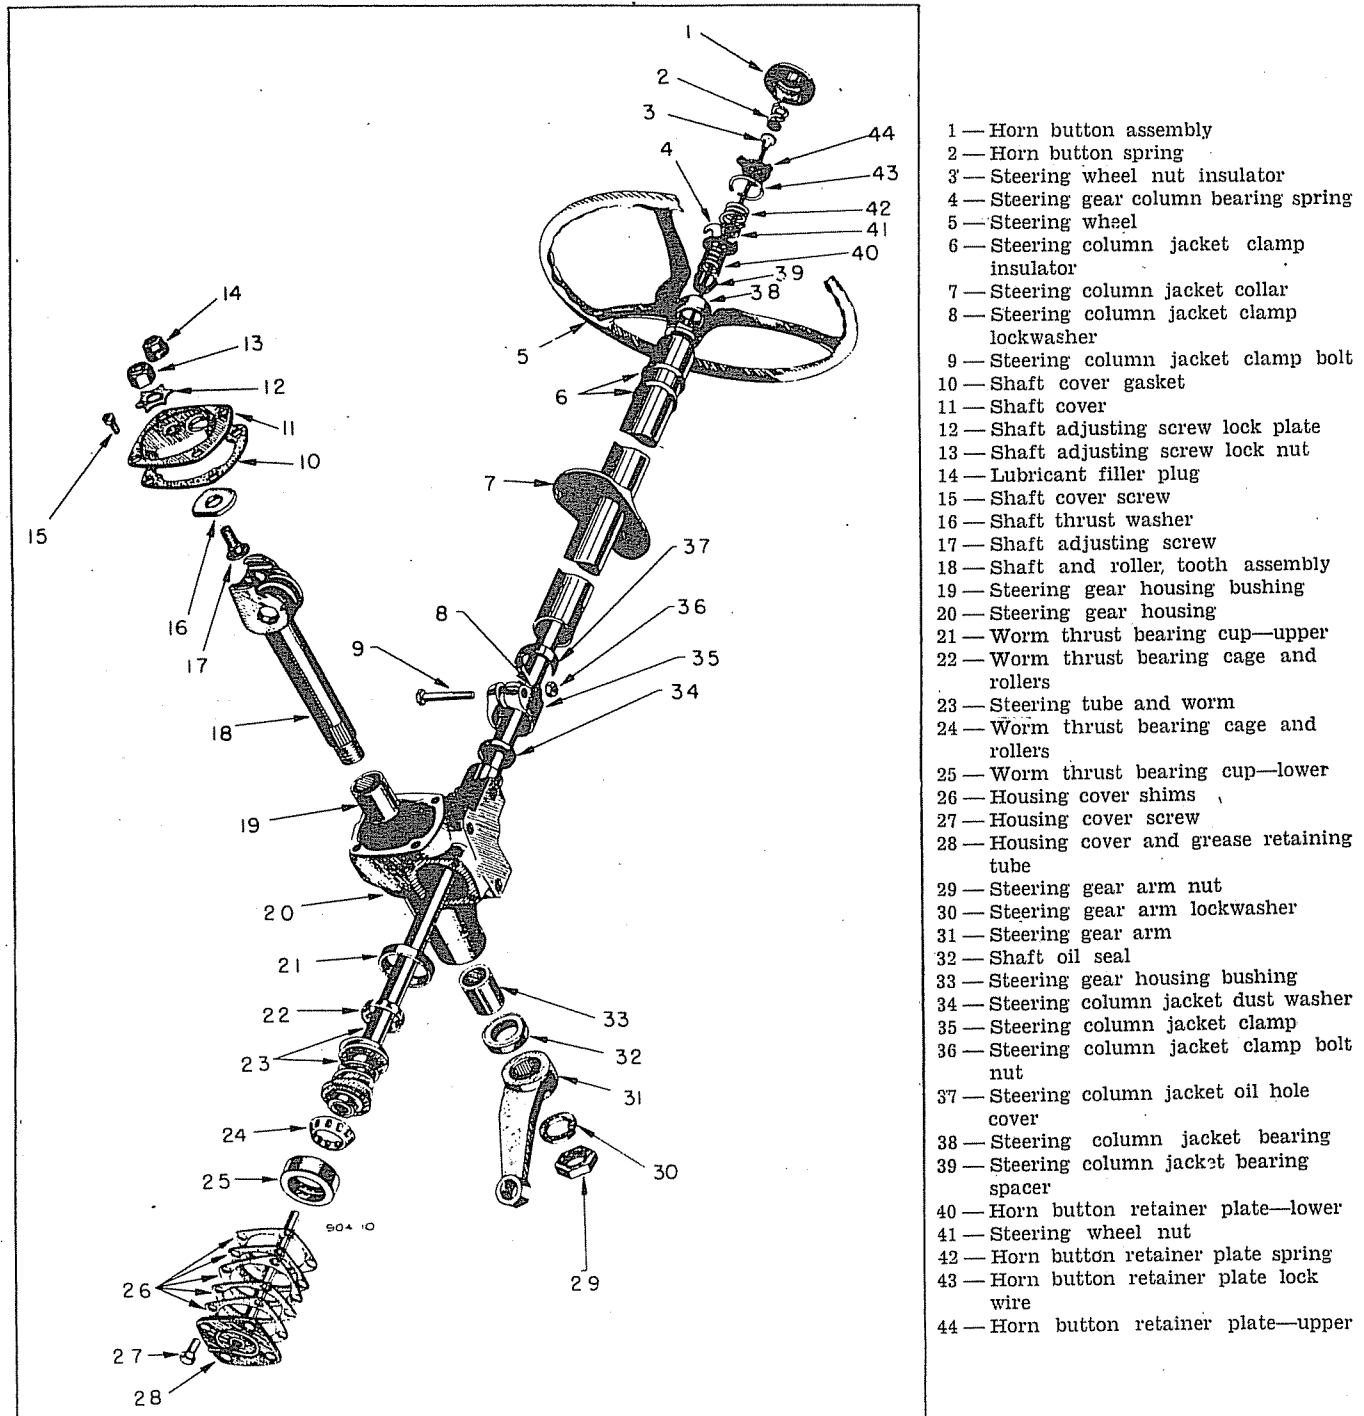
Typical Steering Gear (Disassembled) Worm and Roller Type.
